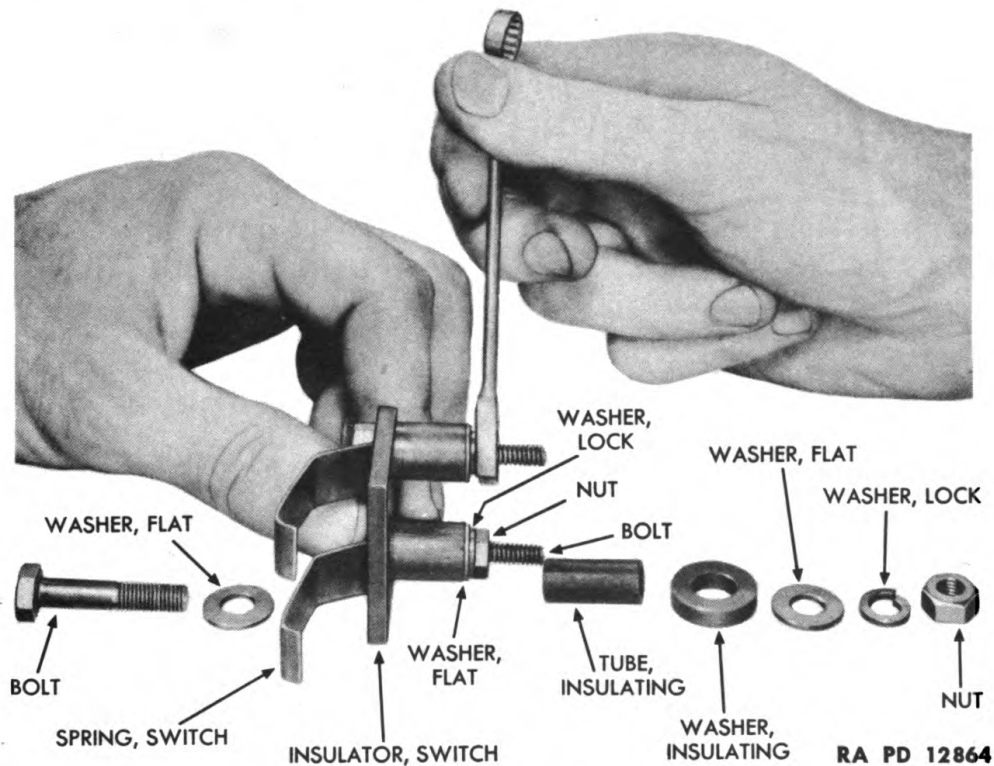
Removing Insulating Tubes and Switch Springs from Switch Insulator
